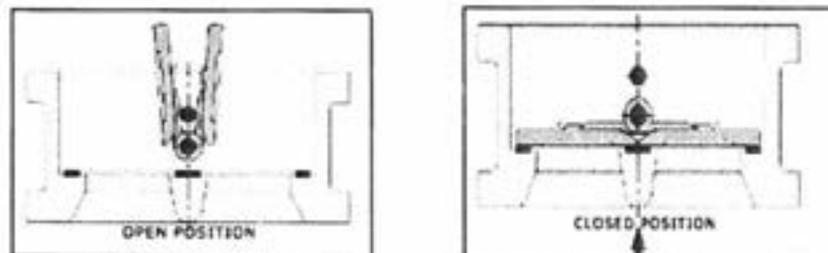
Basic working principle of Dual plate check valve operation
